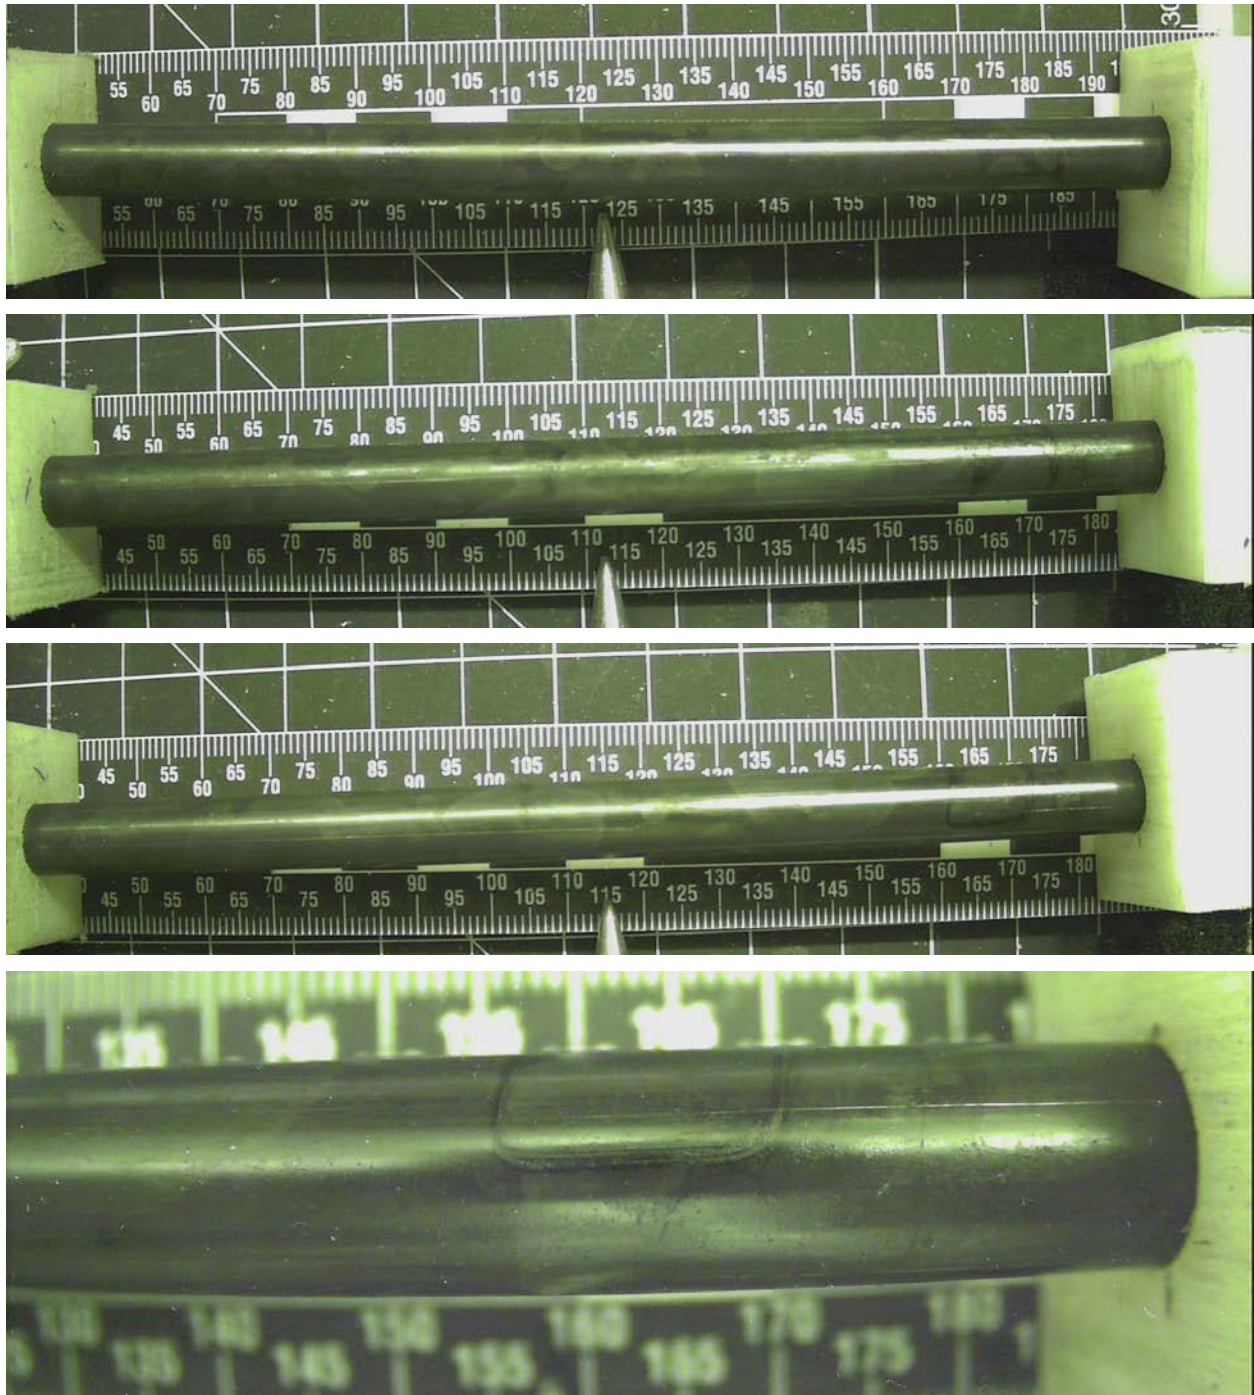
Post-Tensile Image Top Fracture for KP-2-13
